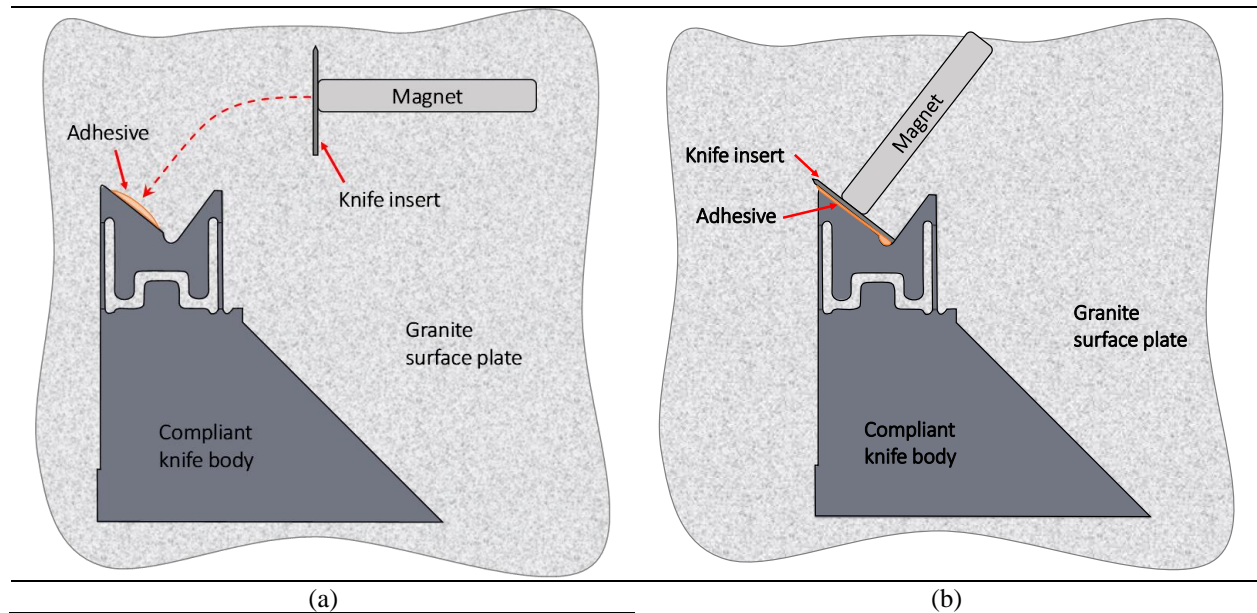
Schematic of compliant knife and knife insert assembly process
